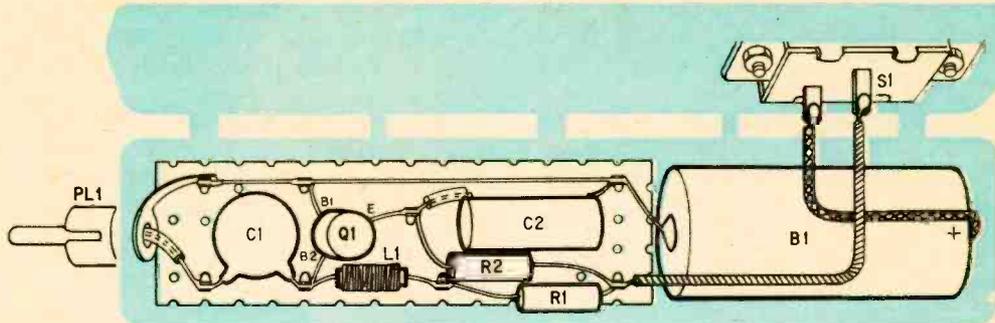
Diagram above shows location of parts on a 2¼ x ¾-in. piece of perforated board. Layout isn't critical; you may change it to suit whatever enclosure the injector is to be built in. Board is held in place by ground lug fitted over plug PL1's neck and soldered to flea clip in upper left corner of board. Use flea clips for tie points for parts.
